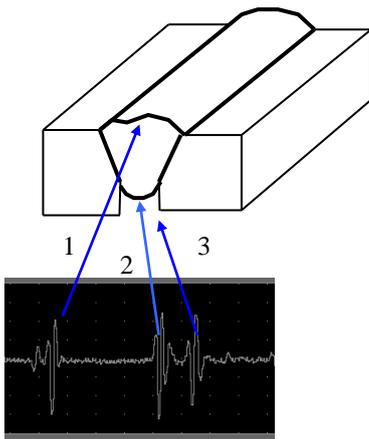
Incomplete root penetration weld defect A-scan obtained from the V groove weld.
